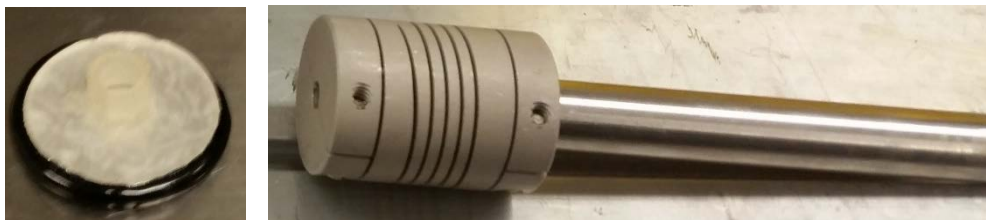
3D printed photopolymer tool (left). Cylindrical flexure (right).
